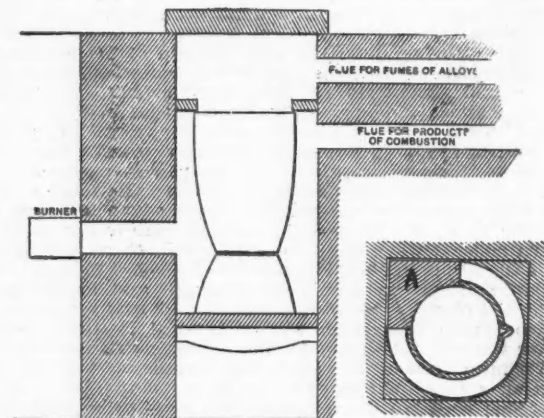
CRUCIBLE FURNACE FOR BURNING PETROLEUM.
